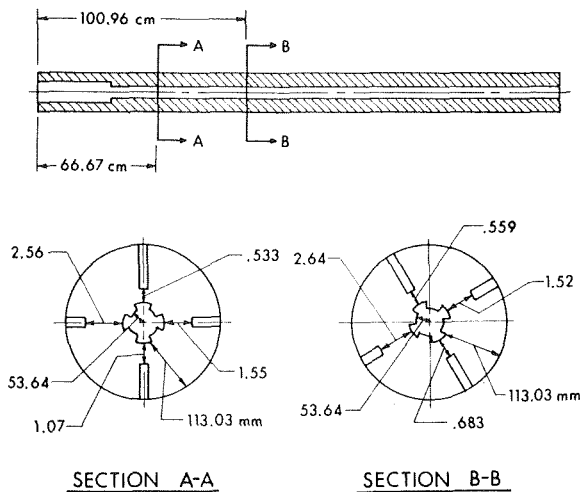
Location of thermocouples in 105 mm M68 gun tube
